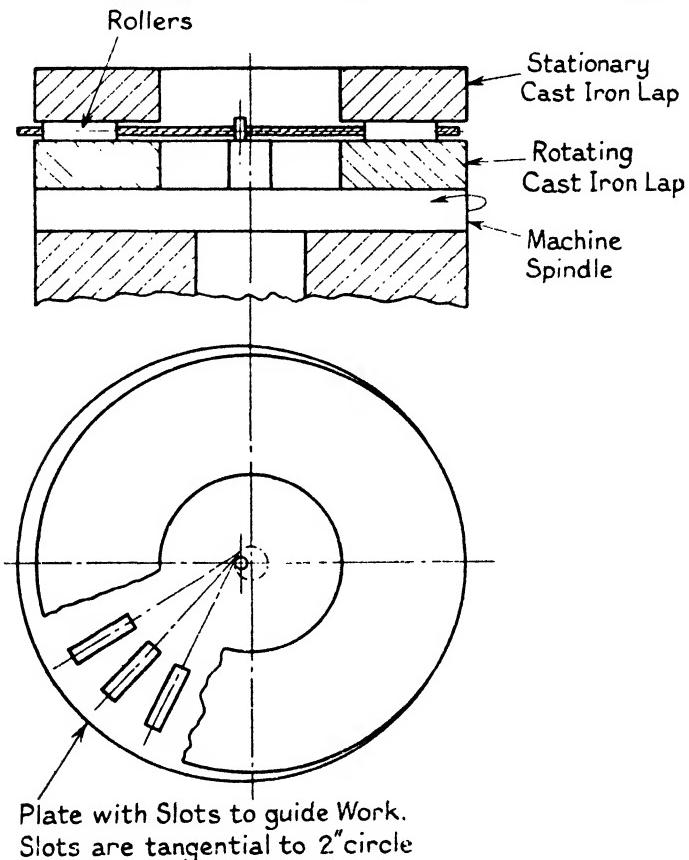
LAPPING ROLLERS IN ROTARY LAPPING MACHINE
